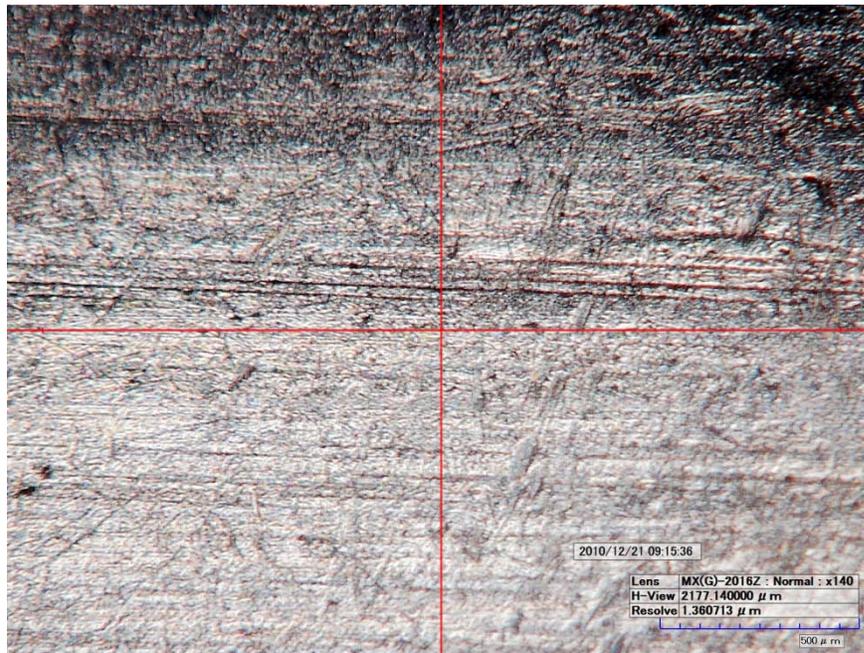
PFPE P1DWNA003 pre-test. The narrowest field of view used in the inspection photographs.
